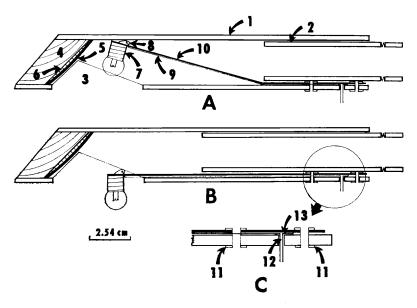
Mid-longitudinal, cross-sectional sketch of cavity inspection device showing internal parts: (1) outside tube, (2) inside tube, (3) viewing window, (4) wooden dowel, (5) mirror, (6) glue between mirror and wood, (7) bulb socket, (8) socket terminal, (9) insulated wire, (10) brass spring, (11) rivets, (12) hole for wire passage, and (13) insulated wire. A - inside tube disengaged and bulb retracted for insertion into cavity, B - bulb extended with inside tube engaged for viewing, and C - blow-up of brass spring attachment and electrical wiring leading from outside tube.
